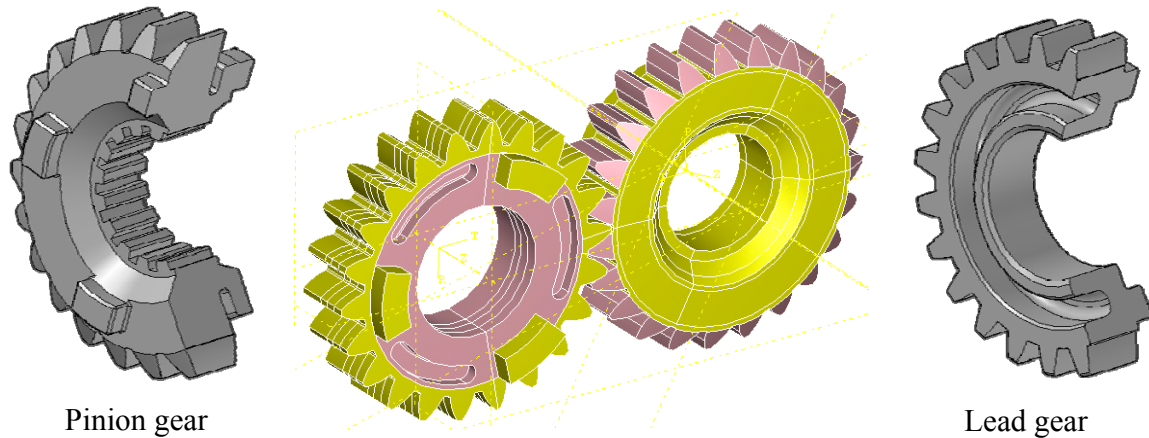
Three-dimensional pinion and driven gear models developed in [4.12].
